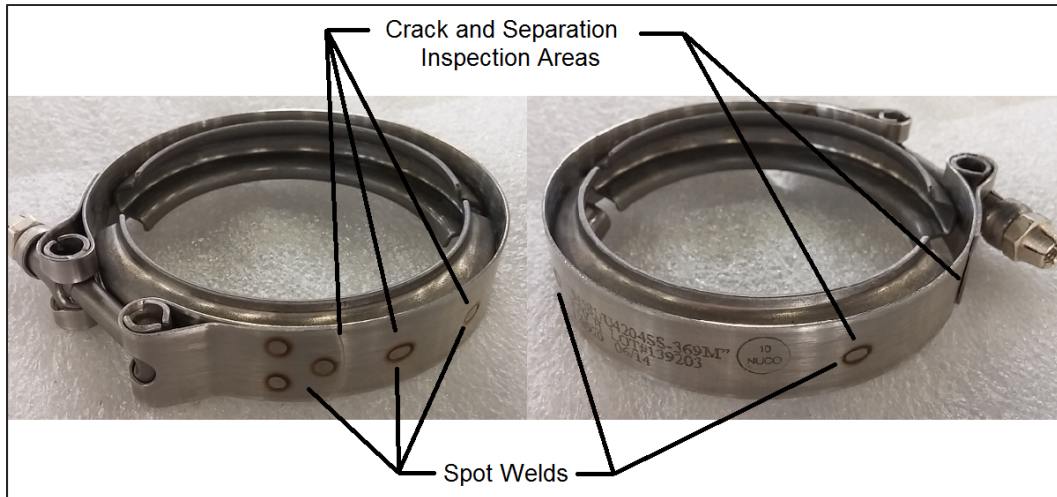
Spot weld locations and crack and separation inspection areas (P/N LW-13464 shown)
